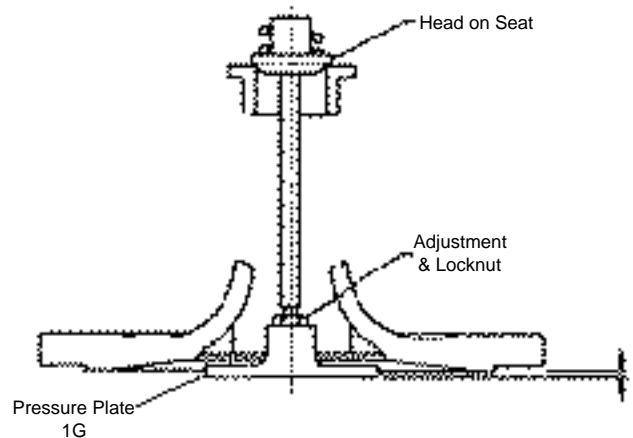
Note in 1/2" thru 4" sizes, top of valve must be completely assembled and head must be on seat when measuring dimension "A" and when reassembling diaphragms.
